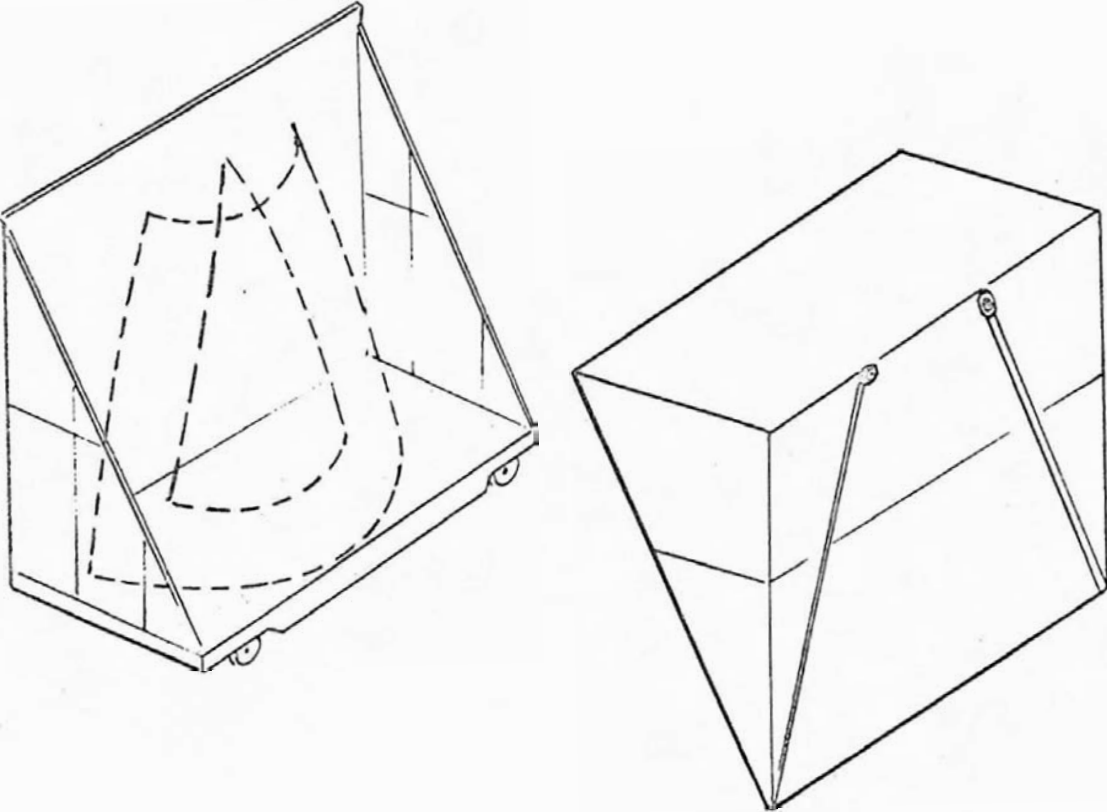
19. Shipping Fixture 65B63001 for Fairing Assembly
